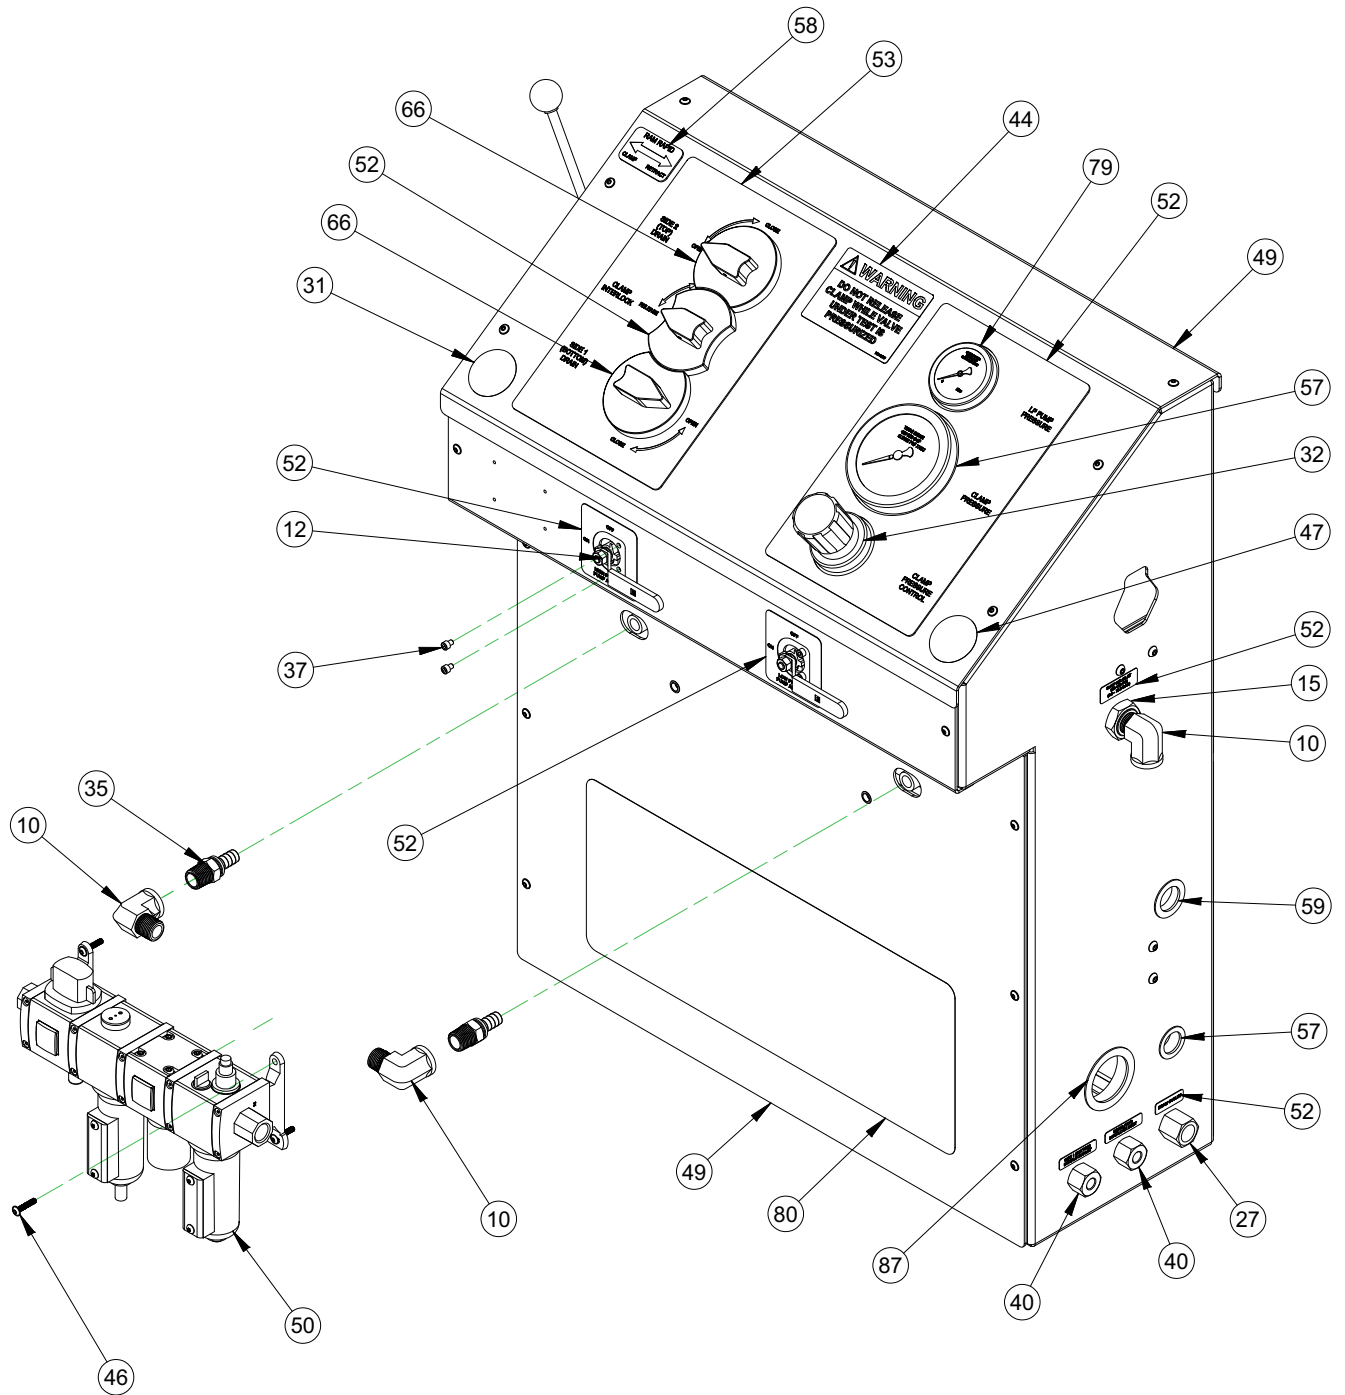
CONTROL CONSOLE USV ASSEMBLY FRONT (P/N 89020)
